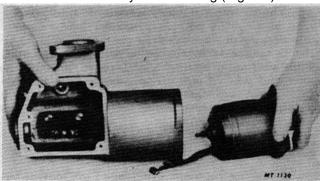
Separating Electric Motor From Housing IMPORTANT
